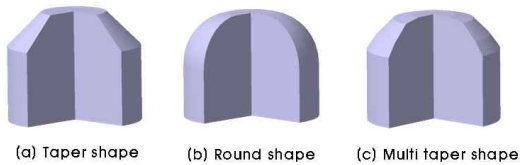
Shapes of Pre-form for 1st Deep drawing process
